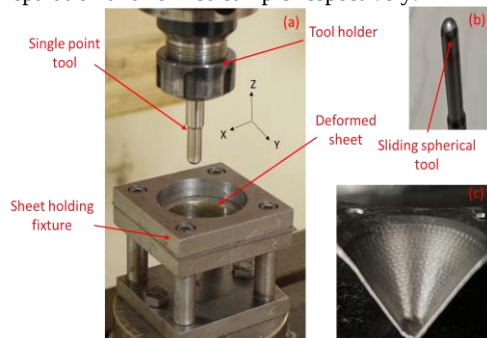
(a) Incremental forming fixture and tooling mounted on the CNC machine; 2(b) single point spherical tool; 2(c) formed sheet
